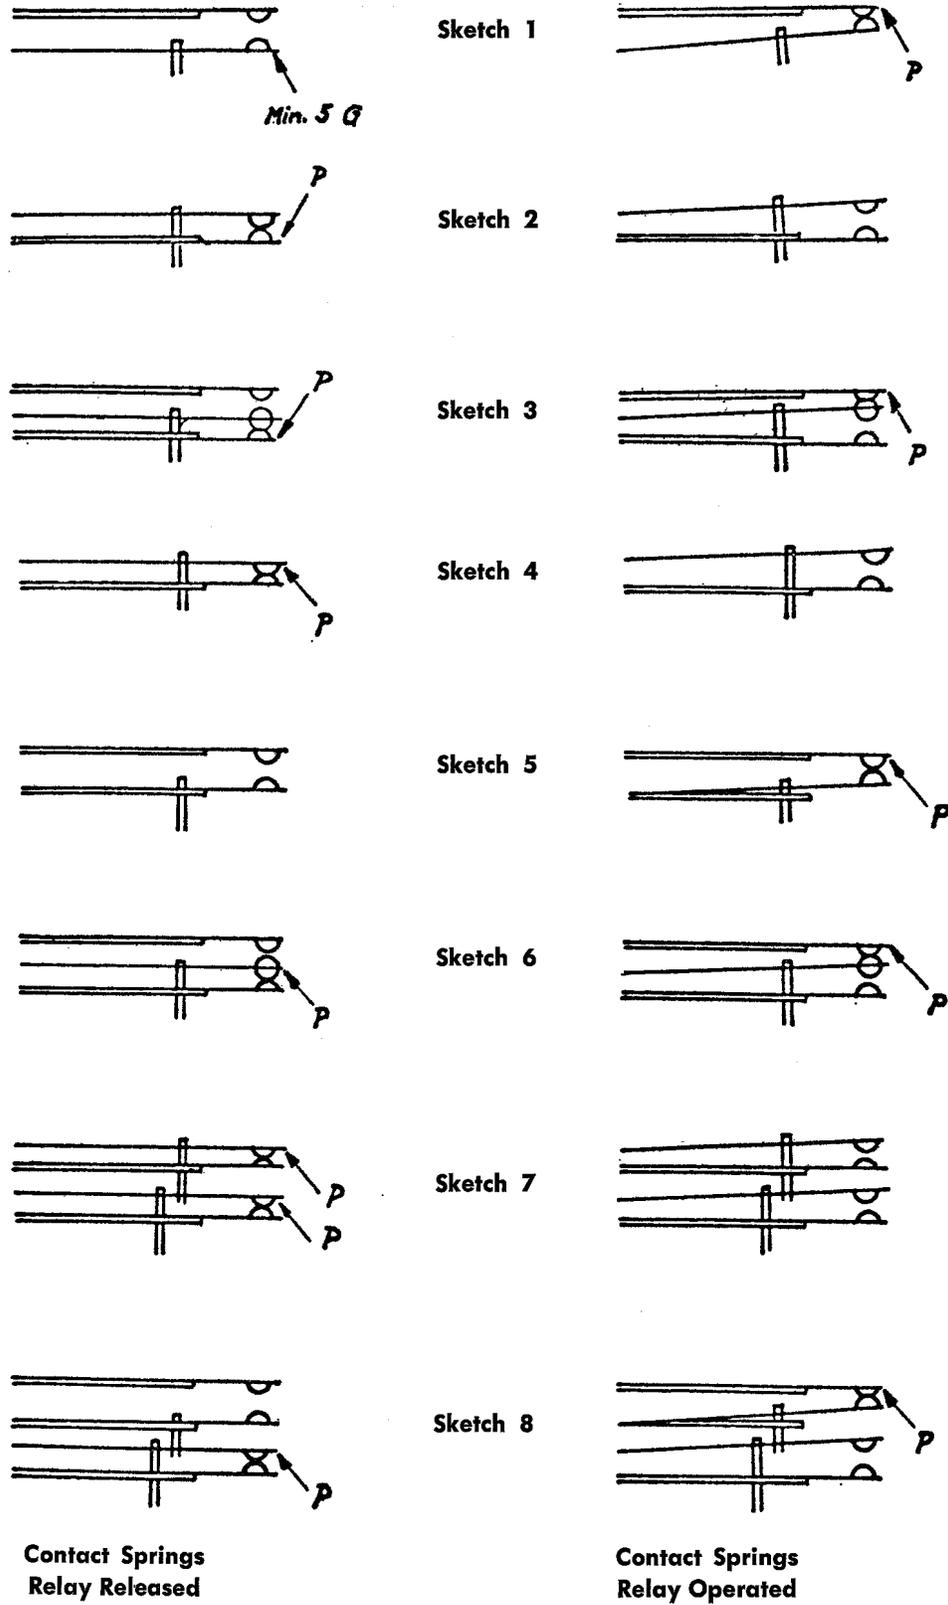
Contact Spring Sketches — Gfeller Relays
